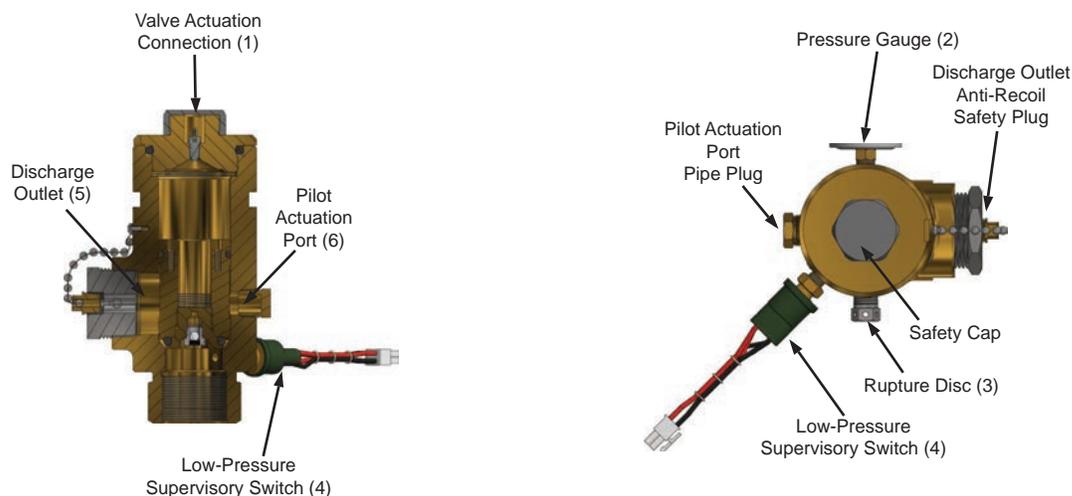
Sv Cylinder Valve Assembly
